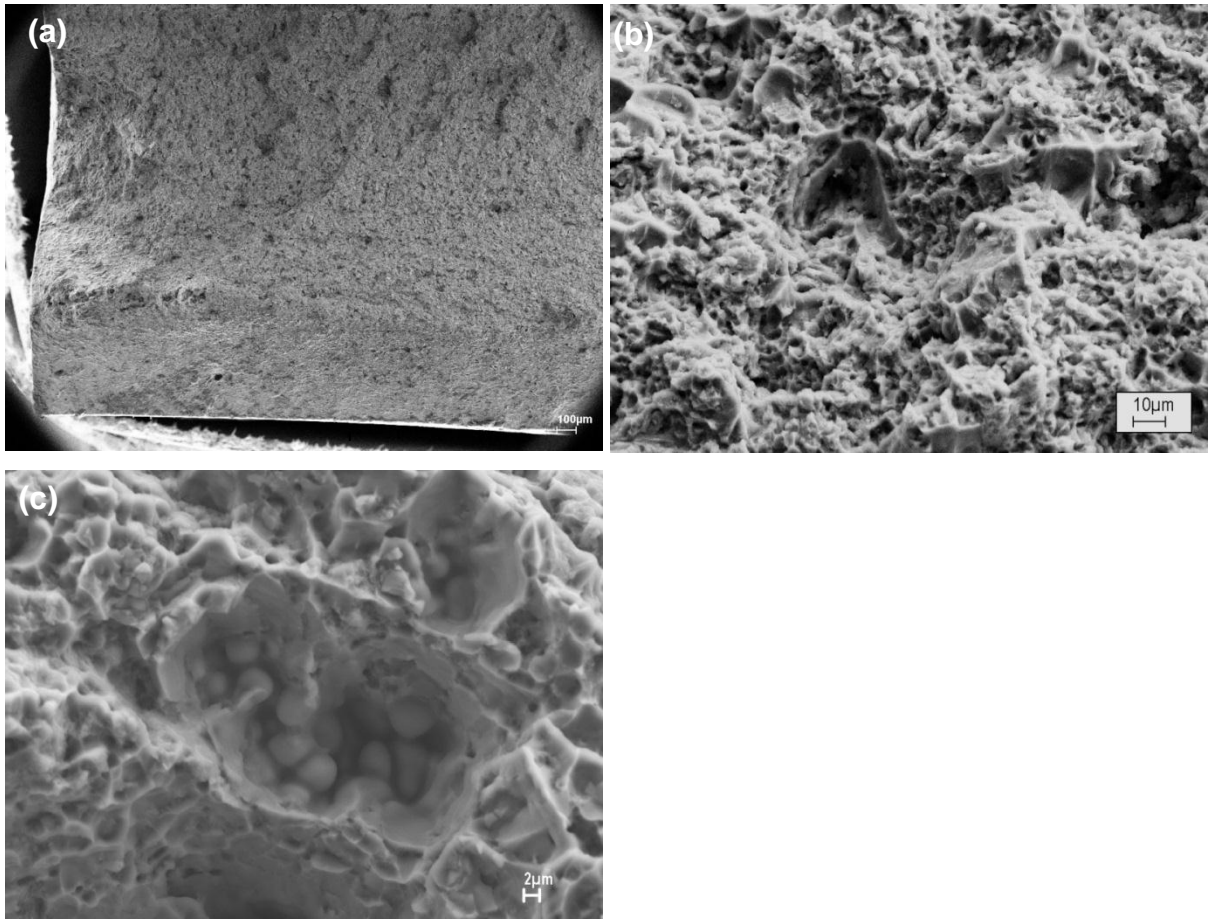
Typical fractographs on a cross section of 3×6.35 mm flat die-cast tensile sample (a) overall fracture image, (b) fracture surface at high magnification, and (c) detailed fracture.
